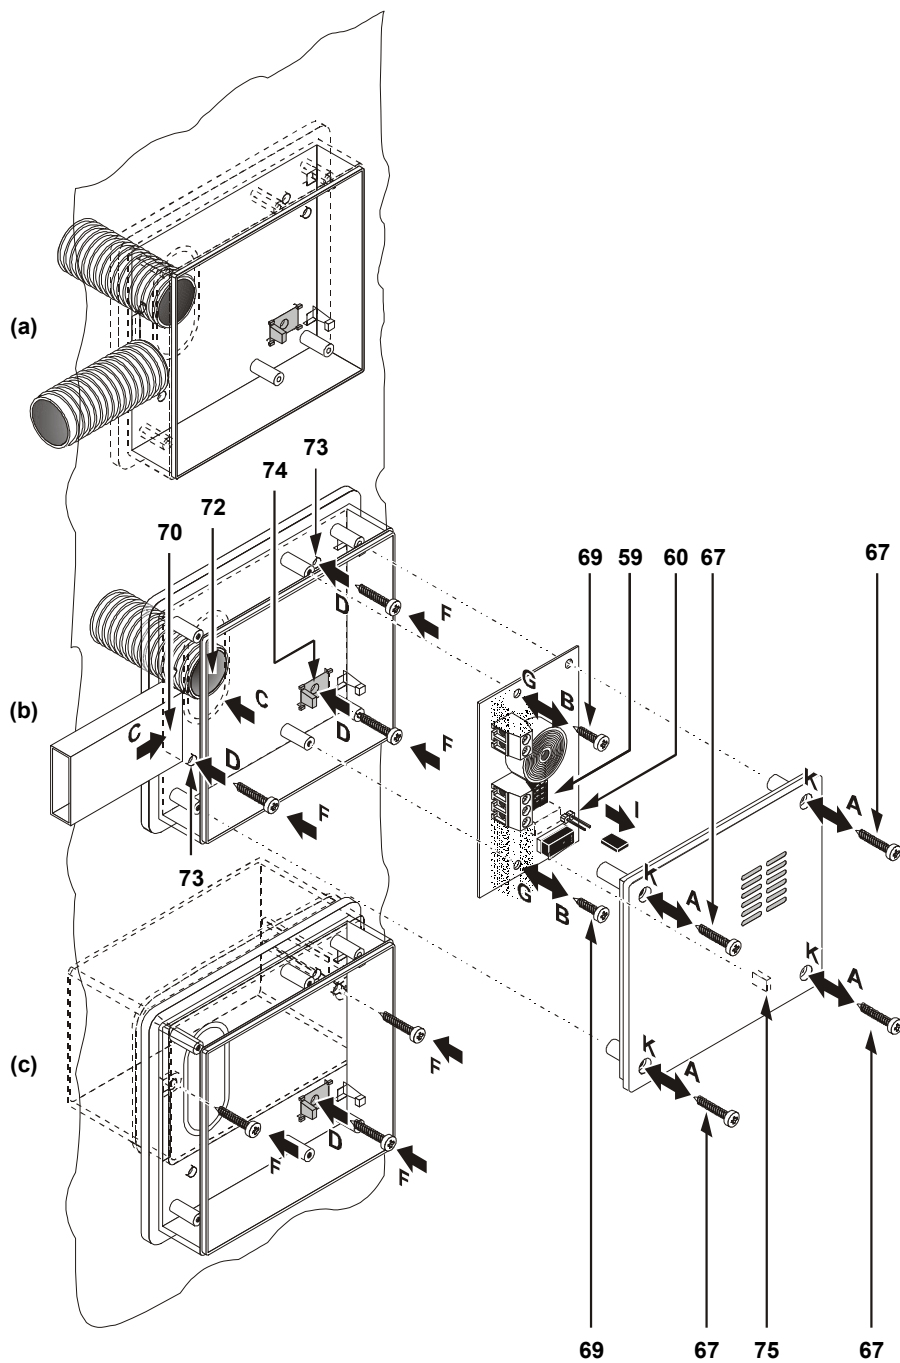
Expander installation: (a) Flush mounting; (b) on view; (c) inside mod.503 box
